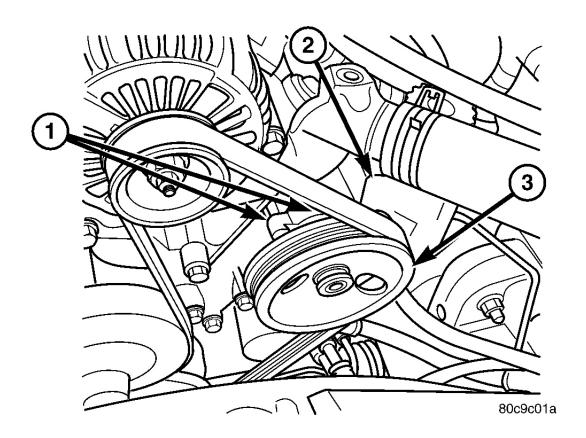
Power Steering Pump - 3.7L Courtesy of CHRYSLER LLC
